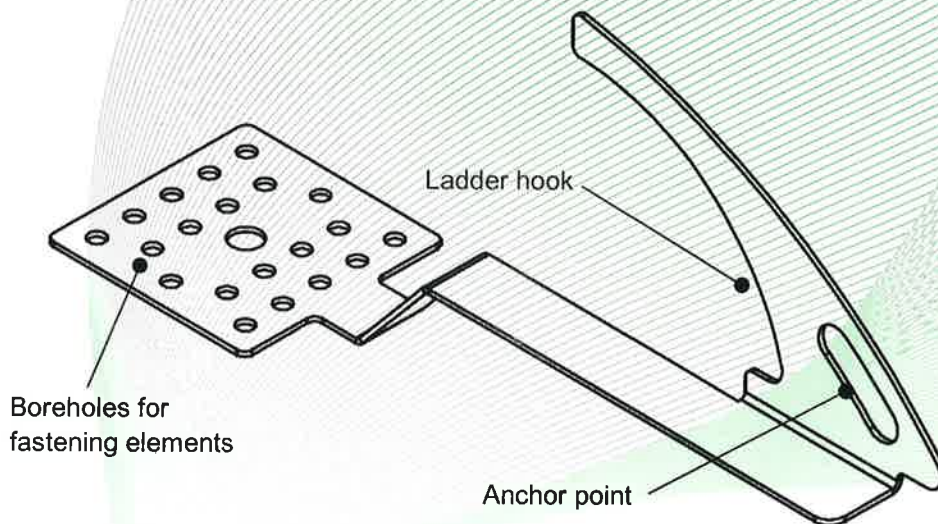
Safety roof hook, type: DHB Plus (galvanized/stainless steel)
